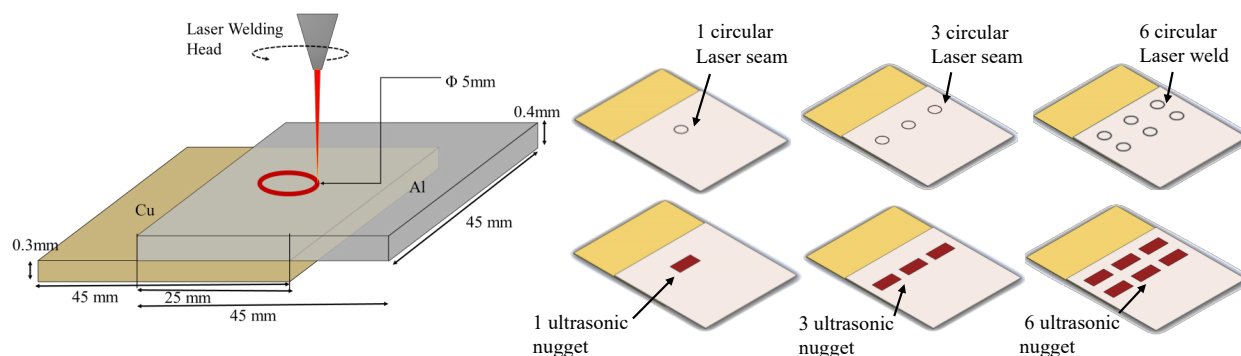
(a) Schematic of (a) joint configuration using laser welding, (b) test samples of 1, 3, and 6 laser seams and ultrasonic nuggets
